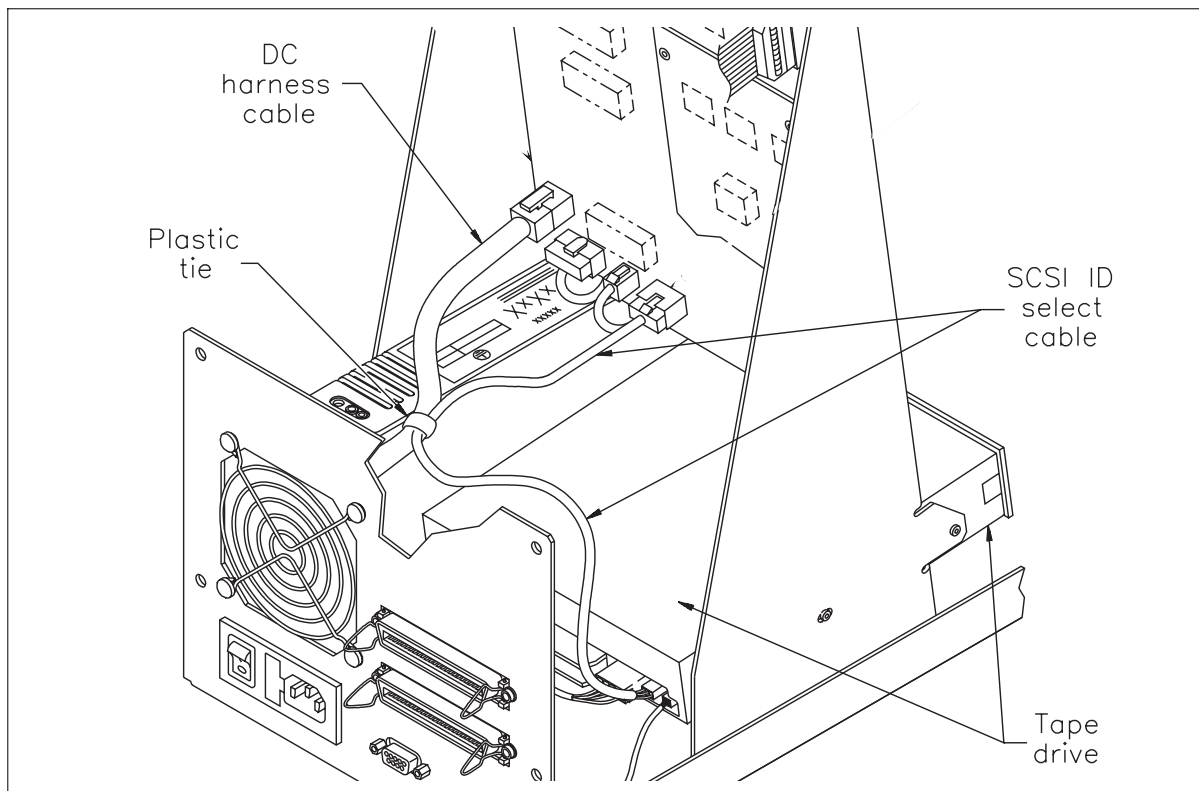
Attaching the DC harness cable to the SCSI ID select cable
